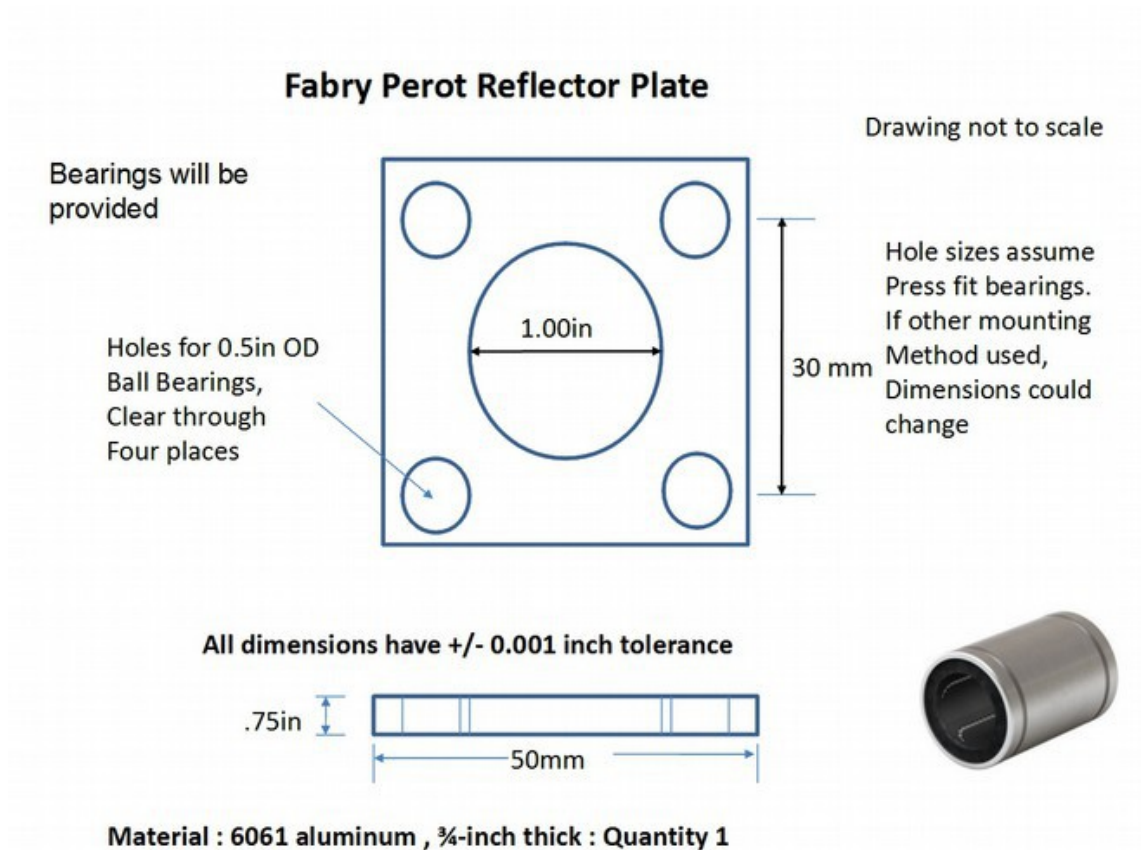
The tunable mirror mounting plate. This plate is thicker and has larger cage-rod holes to accommodate linear-ball-bearings. The ball-bearings help eliminate binding and rocking.
